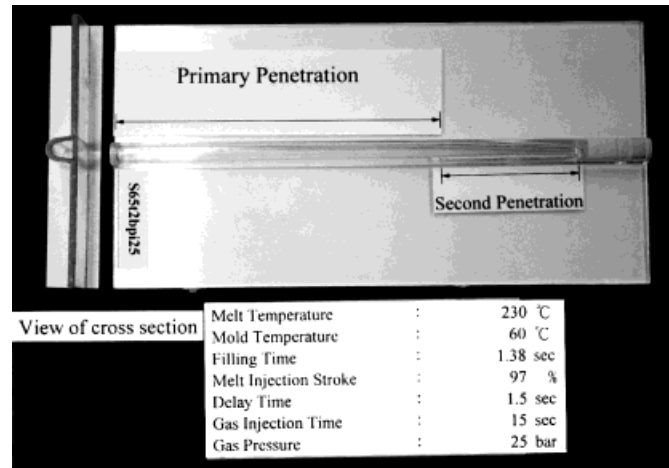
A typical gas-assisted injection-molded plate showing gas penetration.
